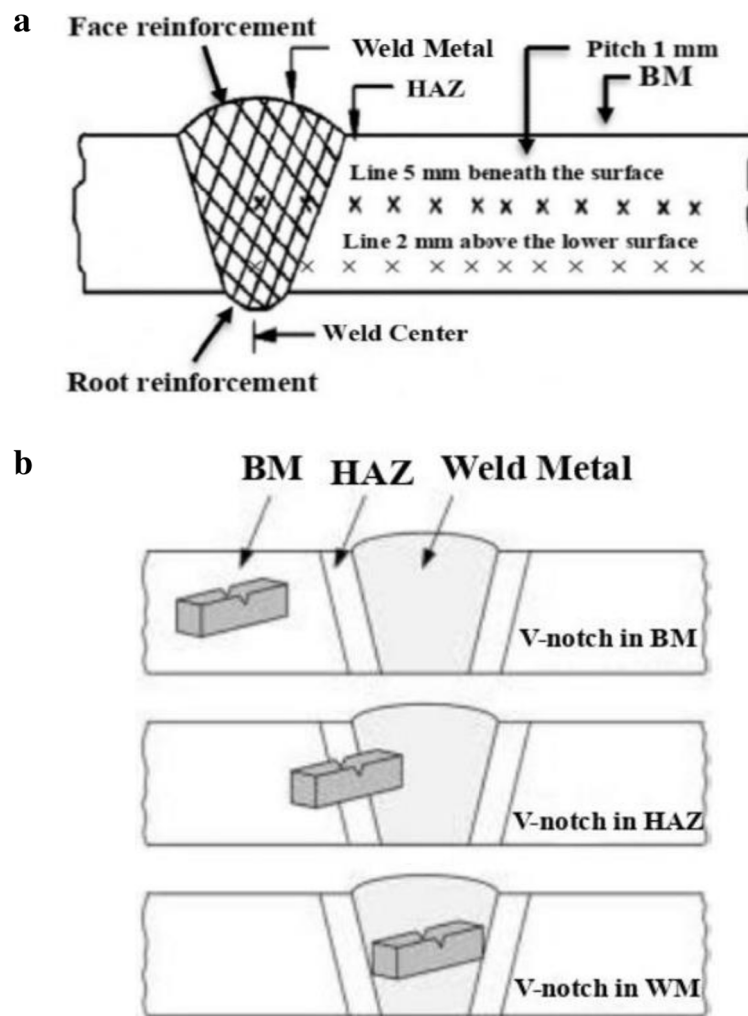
a Location of hardness distribution measurements of the welded specimen [16]. b Location of V-notch of the welded specimen for impact test [36]
